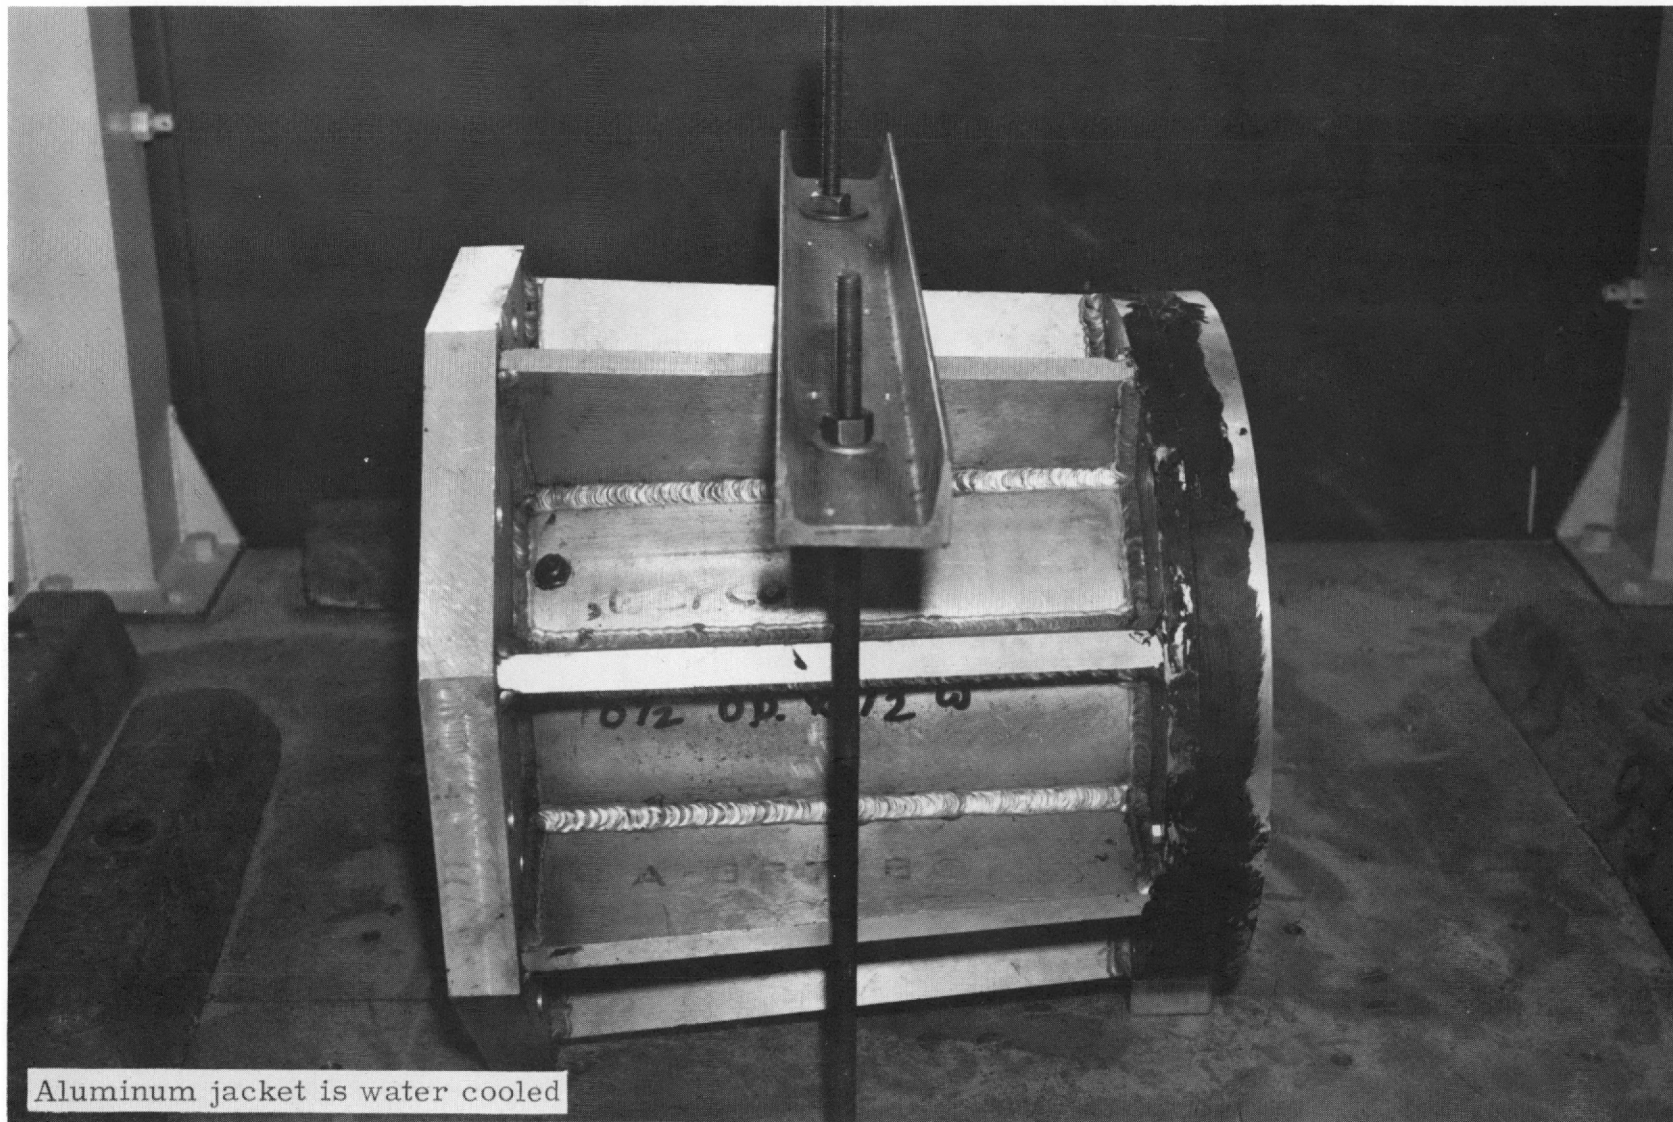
SNAP 7A-7C Thermoelectric Generator and Test Fixture Positioned on Barry Medium Impact Shock Machine for Horizontal Shock Tests
